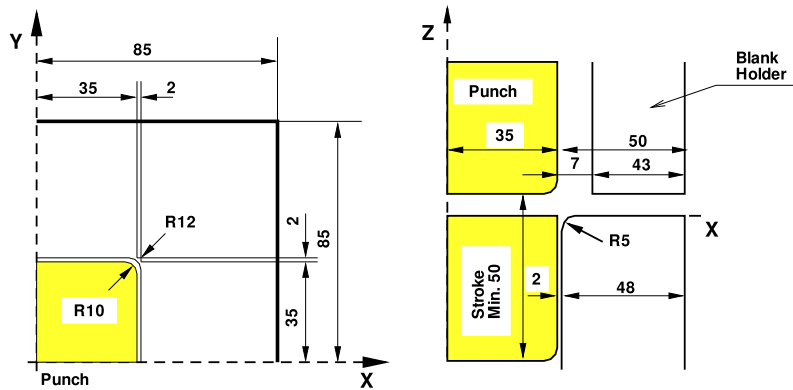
Deep drawing of square sheet, tool's geometry (dimensions in mm).
